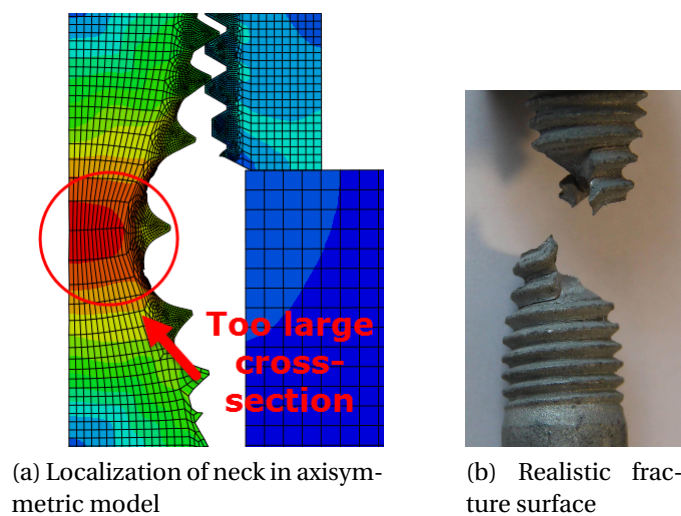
Cross-sectional material in bolt fracture
